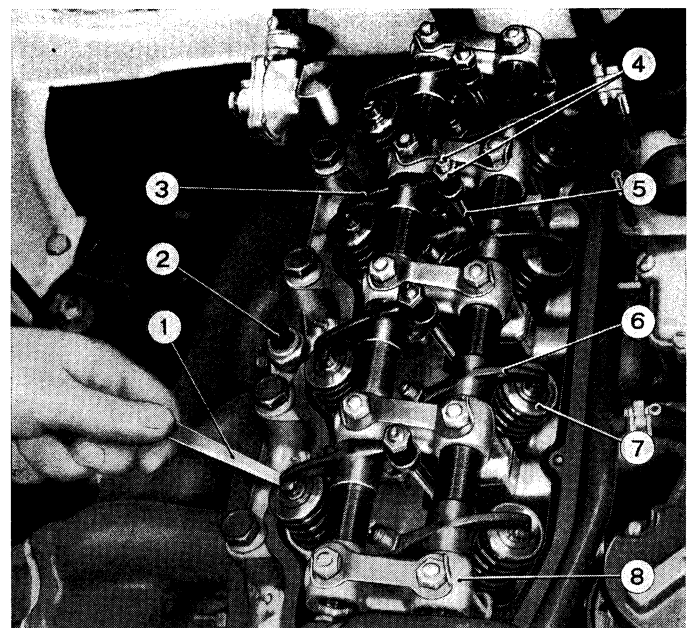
Close-up view of cylinder head, showing tappet clearance adjustment (engine 115 C.005).
